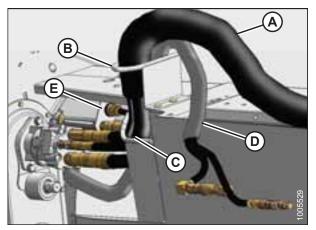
Hose and Electrical Bundle – 4.9 m (16 ft.) Header Shown, 5.5 m (18 ft.) Header Similar
